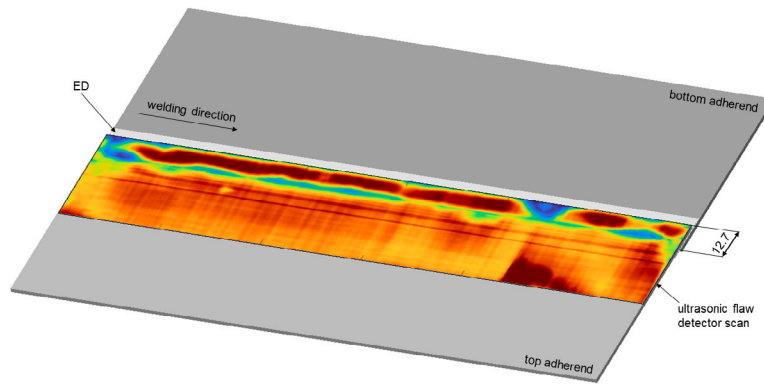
Welded setup (top/bottom adherend & ED) showcasing an ultrasonic flaw detector C-scan.
